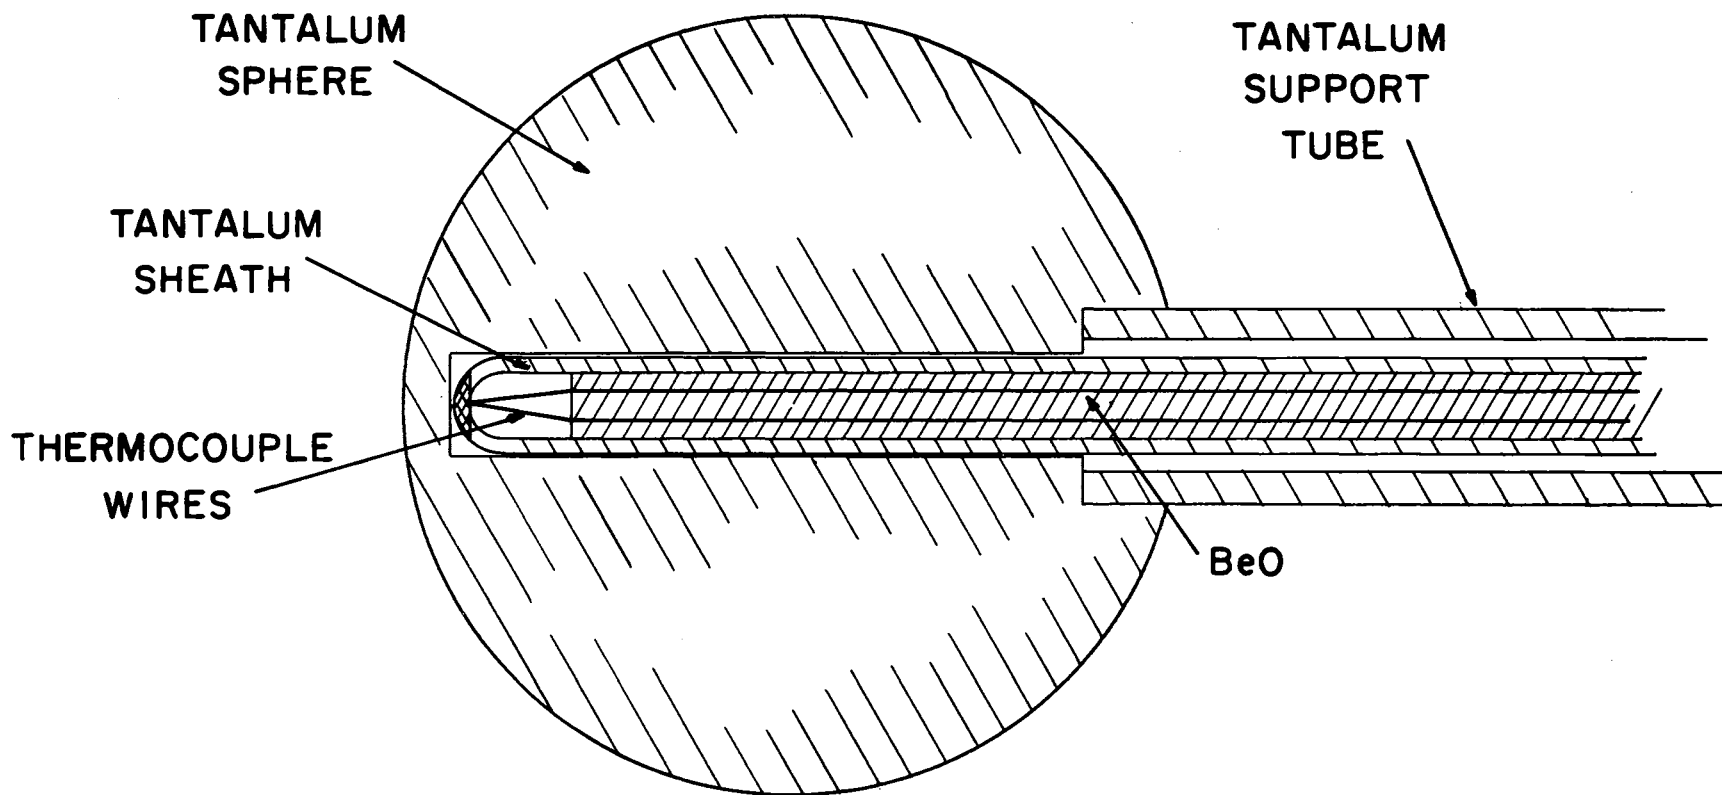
Cross-Section of Sphere-Thermocouple Assembly.
